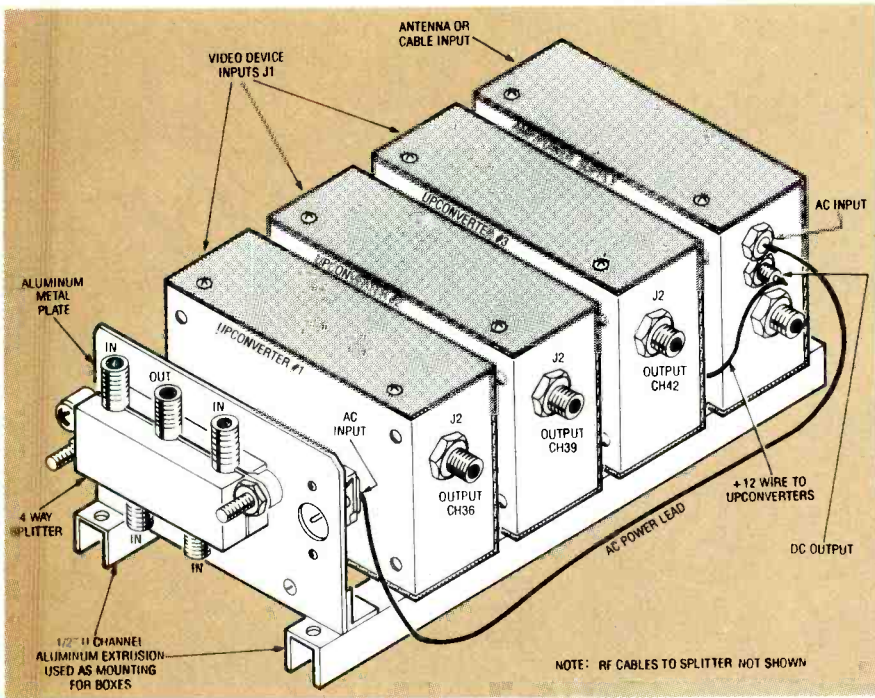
ALL OF THE MODULES for the prototype Video Master are mounted together on a pair of aluminum rails, with everything feeding into a 4-way splitter mounted on one end of the assembly.
